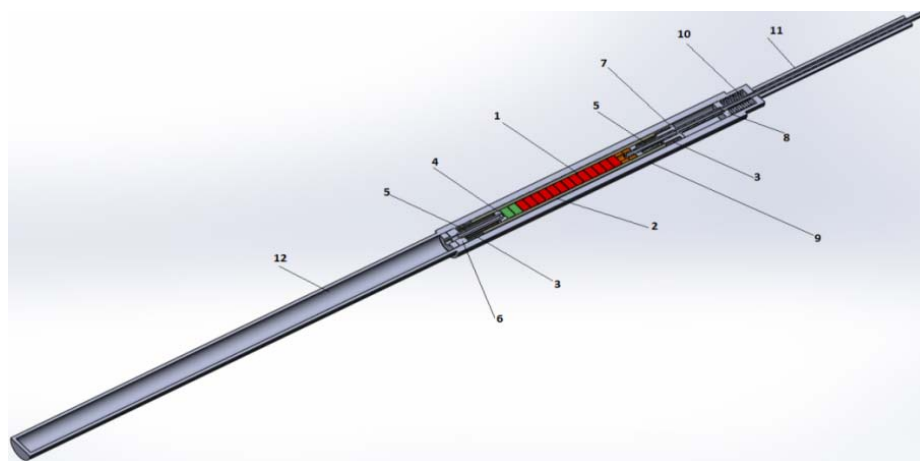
Schematics of the experimental capsule: 1 — fuel stack, 2 — tungsten cladding, 3 — end-springs (4 items), 4 — tungsten pellet, 5 — molybdenum pipe, 6 — bottom spacer of the molybdenum pipe, 7 — internal lock of the thermoelectric transducer (TT) casing (W), 8 — top spacer of the molybdenum pipe, 9 — sealed molybdenum jacket, 10 — thermal expansion absorber, 11 — molybdenum pipe for TT leads, 12 — volume for fission gas accumulation.
